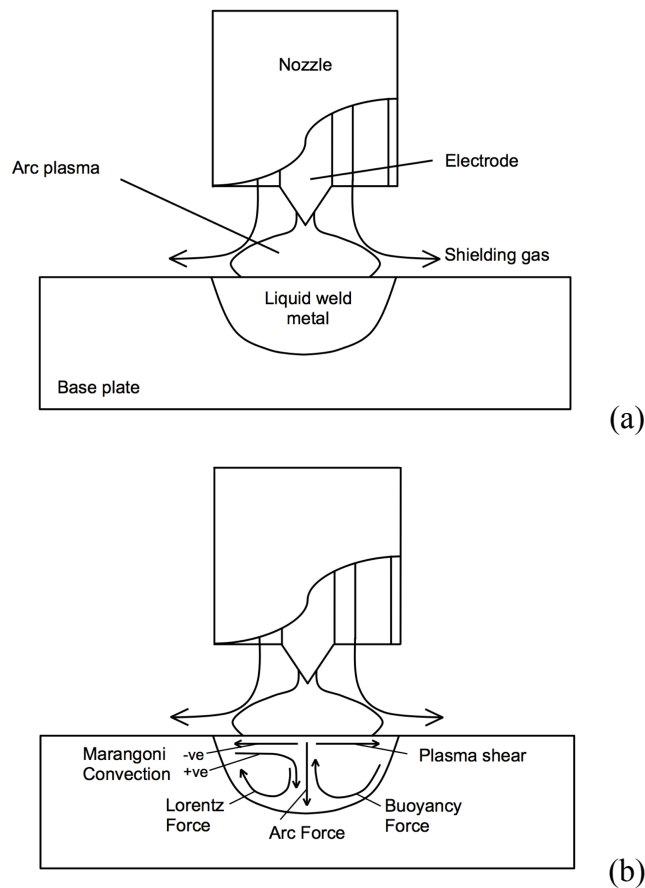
Schematic diagram of (a) GTAW process, and (b) forces acting on liquid weld metal
